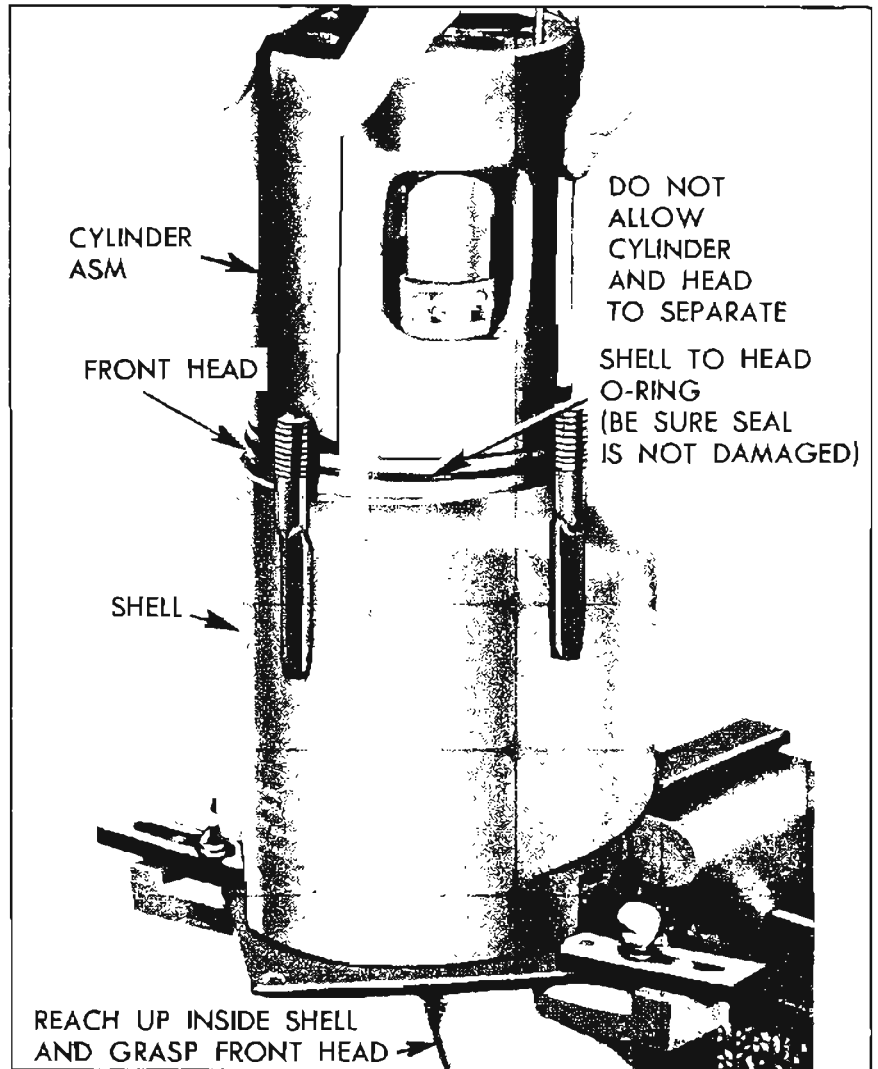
Installing Cylinder Assembly and Front Head in Shell
